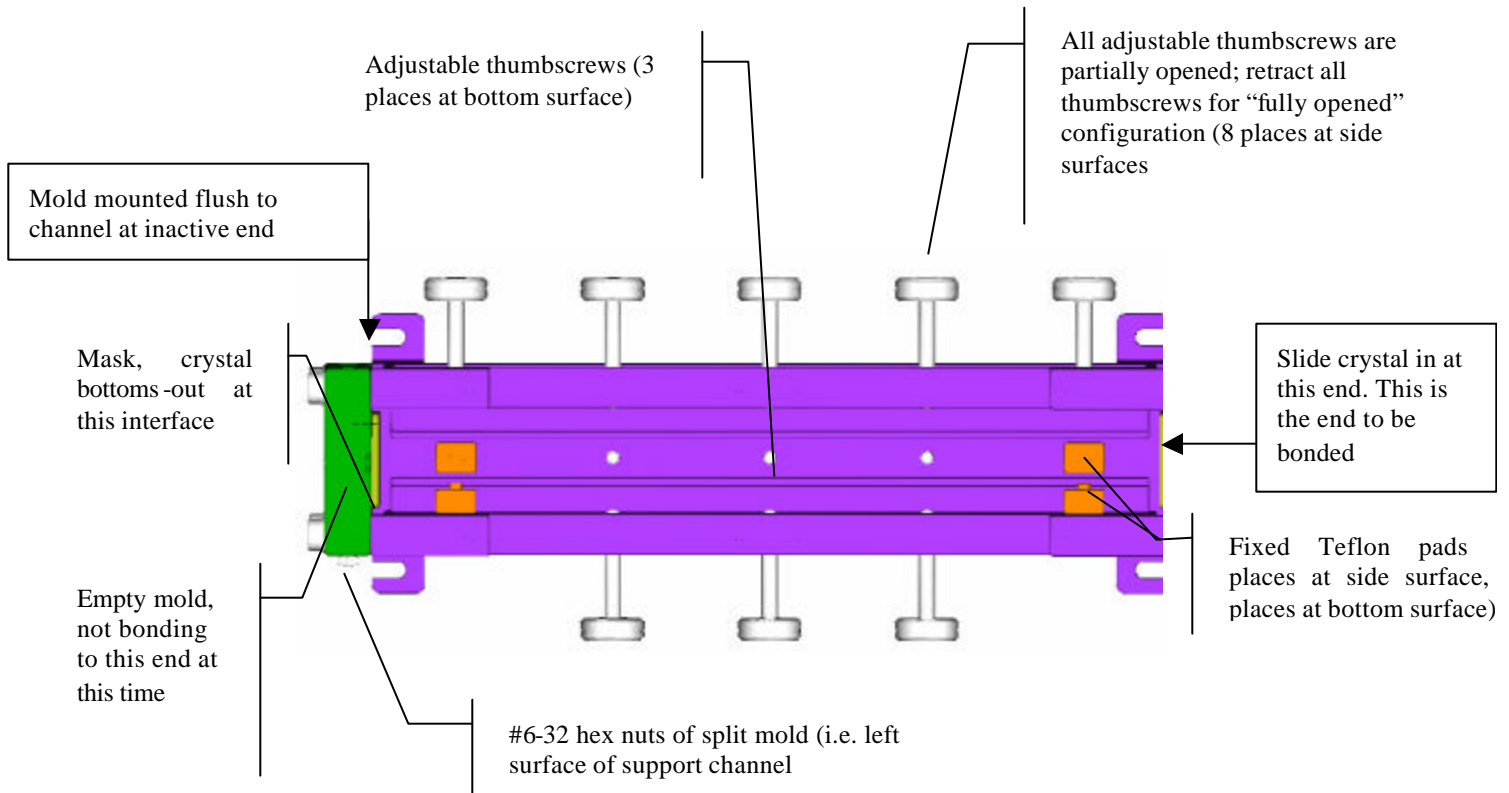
PN B7340 Fixture Assy.; Support Channel & Empty Mold Top View Shown
